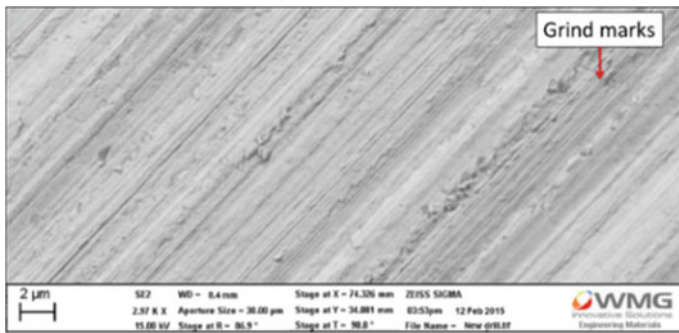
Cutting edge on the tool surface with remarkable grind marks due to tool sharpening
